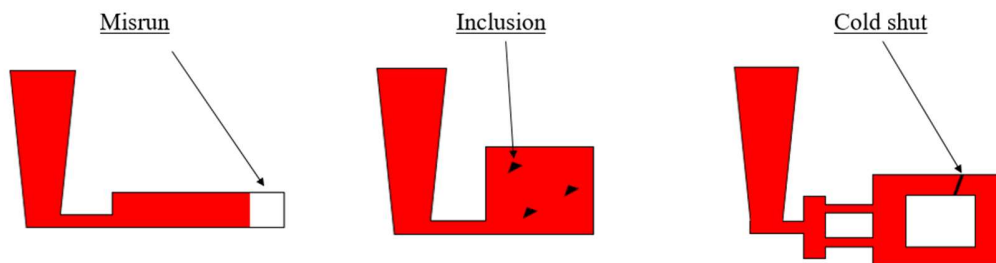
Filling steps defects: Misrun, Inclusion, and cold shut
